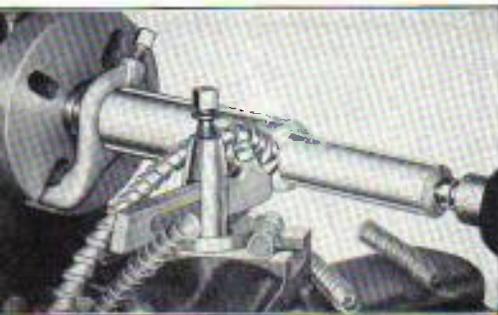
Taking a Heavy Cut with Coarse Feed on a Bar of Machinery Steel in the 9-inch Workshop Lathe.
